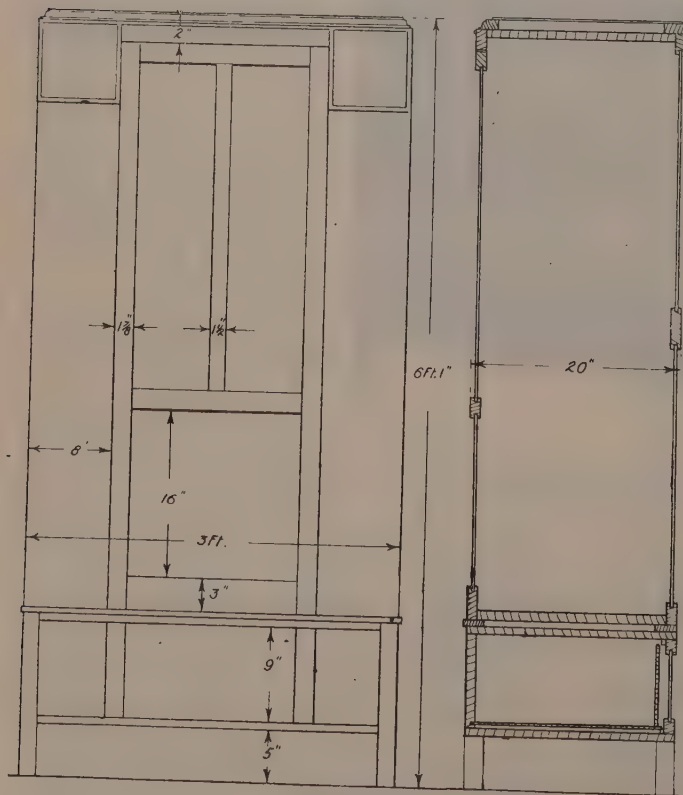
FRONT ELEVATION AND SECTION OF WARDROBE.
